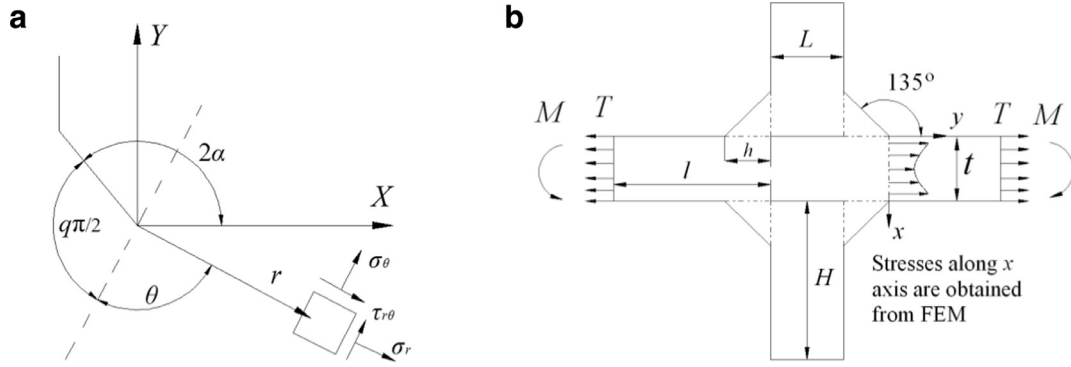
Joint geometry of 135° welded joint.
